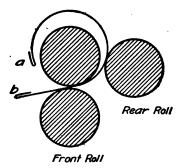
Position of Sheet When Cylinder Is Nearly Formed.
